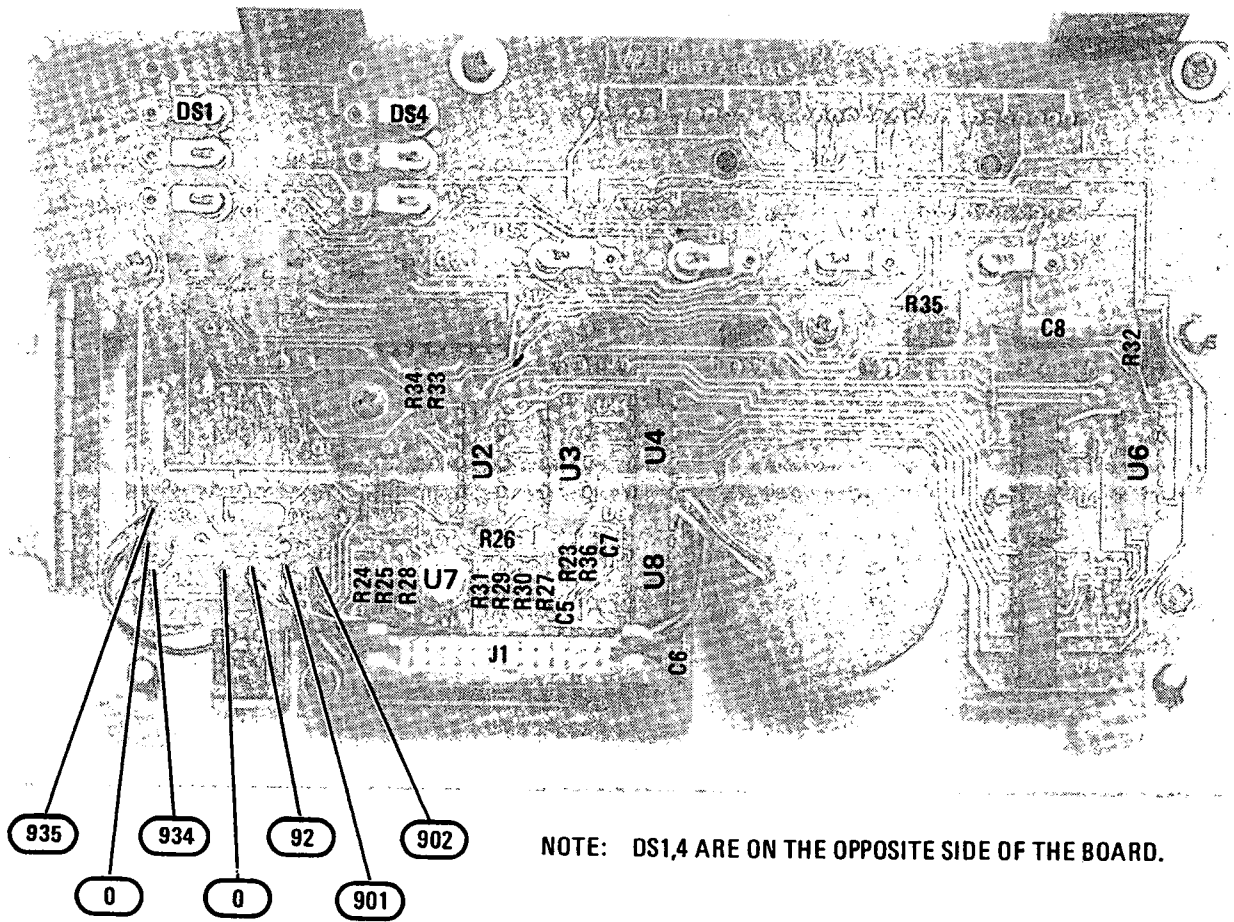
P/O A2A1 DCU Front Panel Assembly Component Locations
